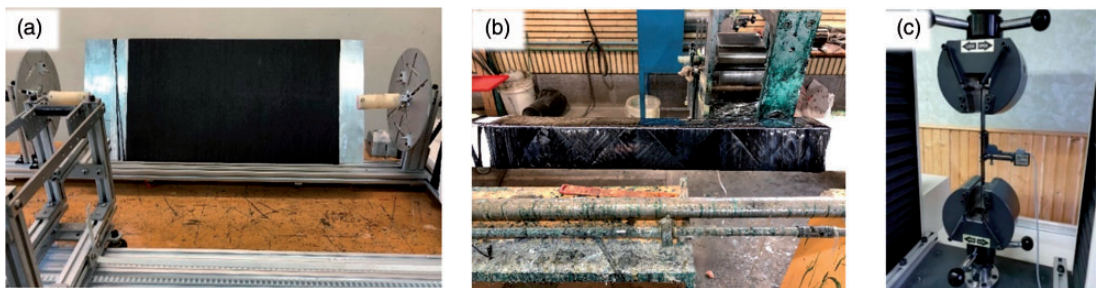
A schematic of the fabrication process of the FW composite specimens (a) Manufacturing of flat specimen, (b) Manufacturing of square-section samples, and (c) Tensile testing.
